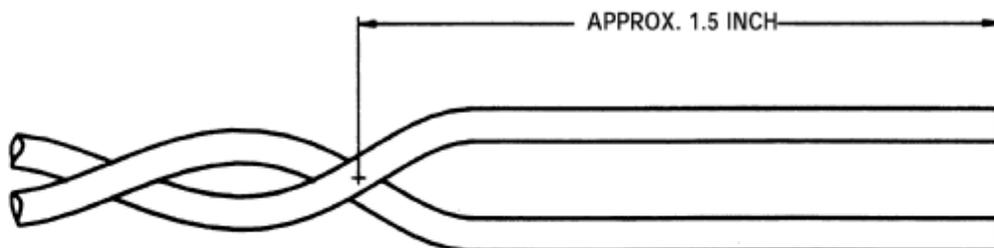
Untwisting and Straightening Twisted-Pair Cable
